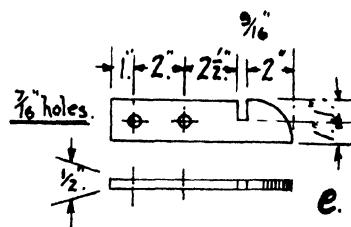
DETAIL OF MILD-STEEL LATCH HOUSING FOR MOULD BOX
